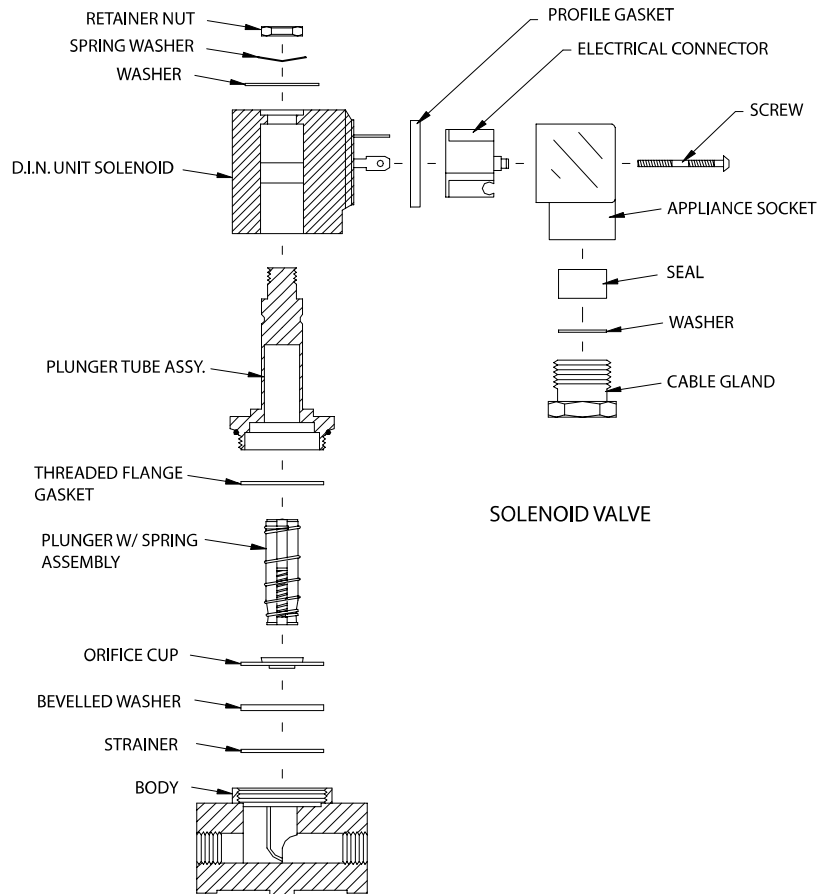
SOLENOID DRAIN ASSEMBLY
